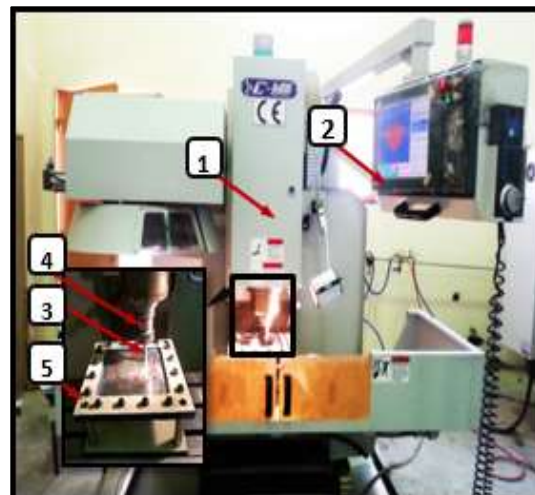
3-Axis CNC milling machine used in experimental work (1) CNC milling machine (2) Machine controller (3) Forming tool (4) Tool holder (5) Forming frame
